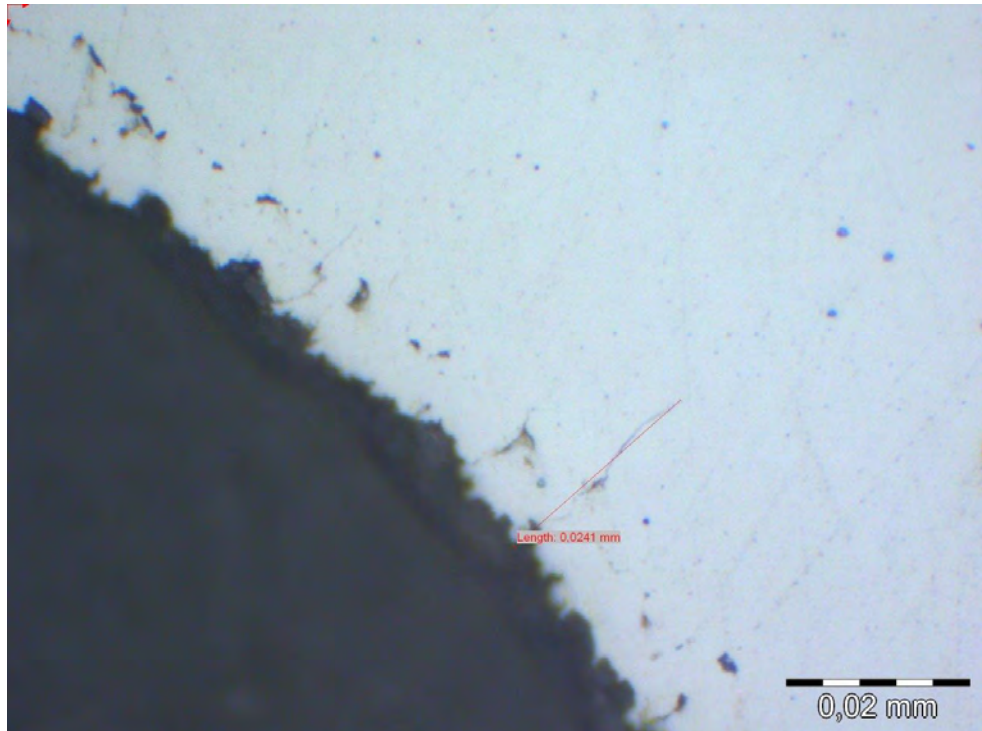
Crack at segment A, third ridge on barrel no. 14389
